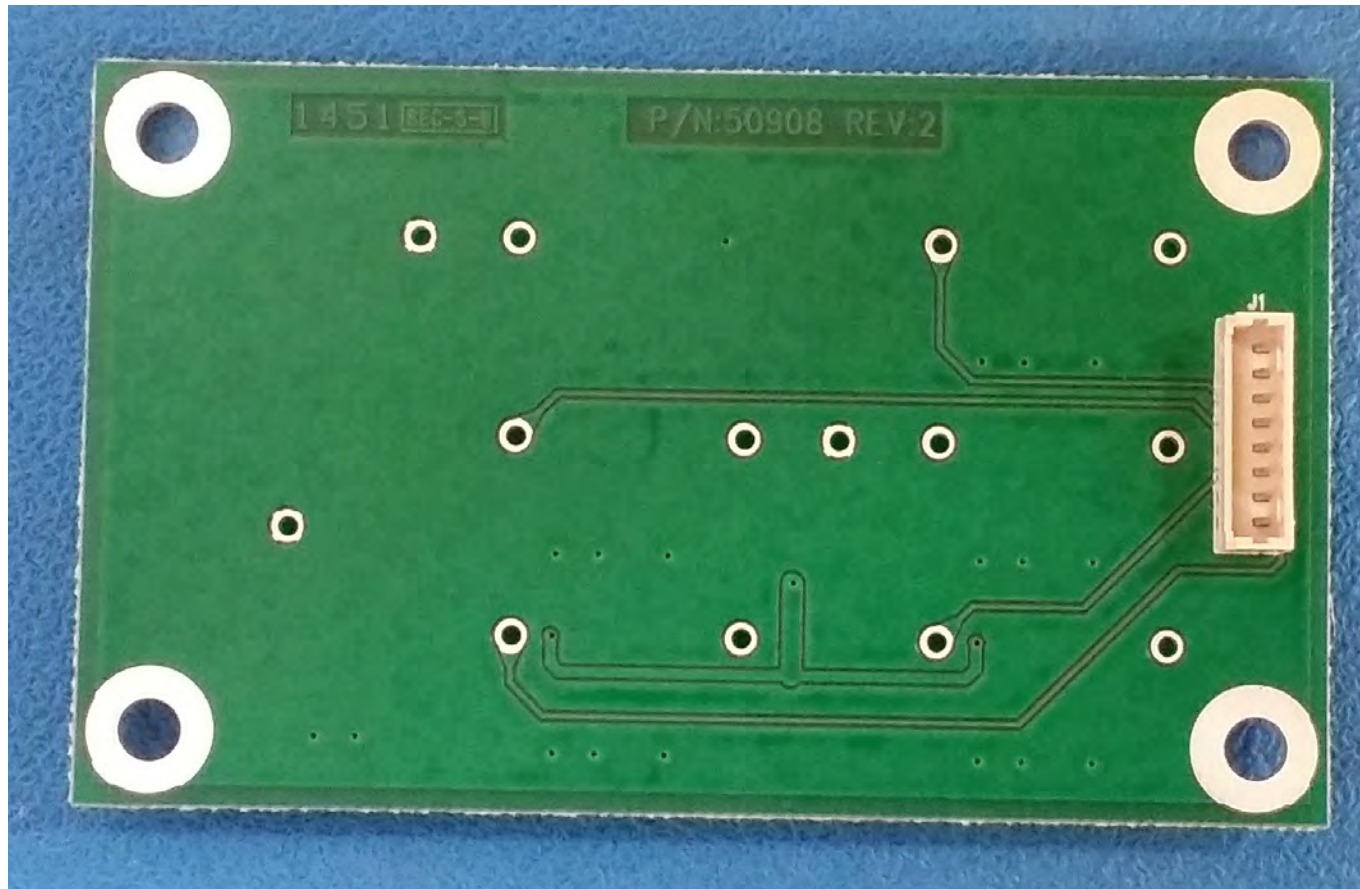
BOTTOM VIEW, POWER SHELF FRONT PANEL LED STATUS BOARD
